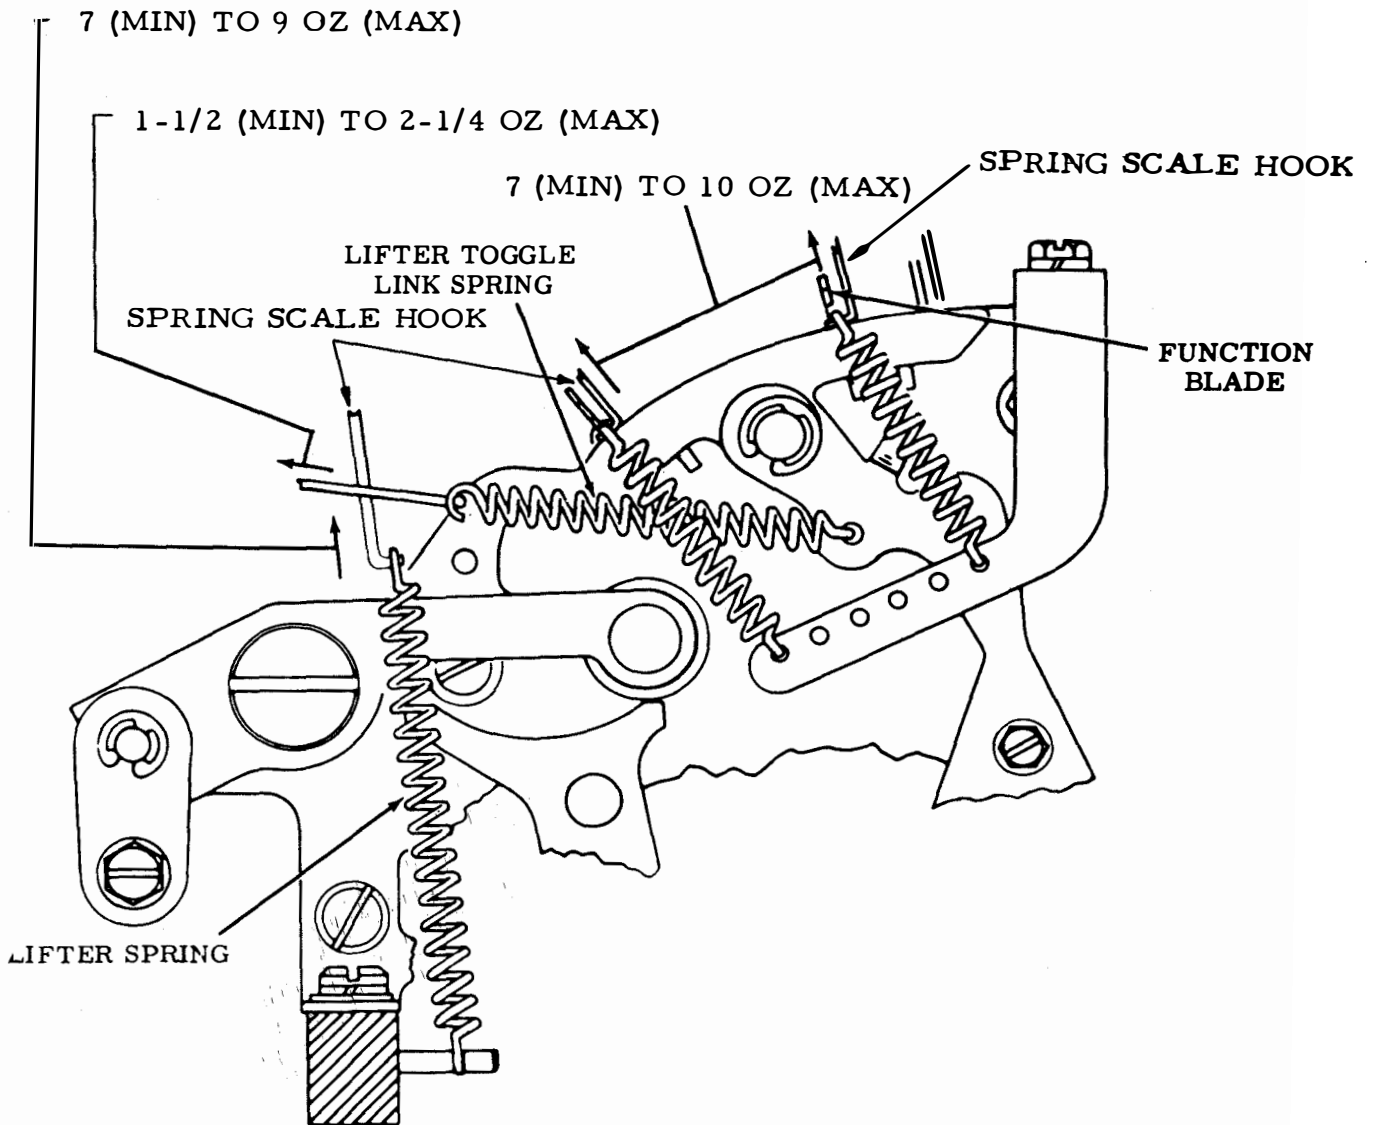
Lifter Toggle Link Spring, Function Blade Springs, and Lifter Spring - Rear View
